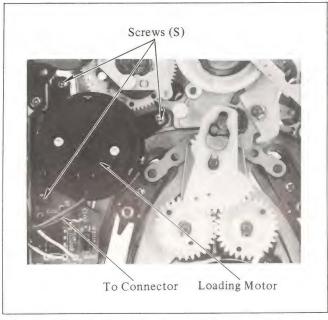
Assembly and Adjustment of Gears and Rods-(12)
